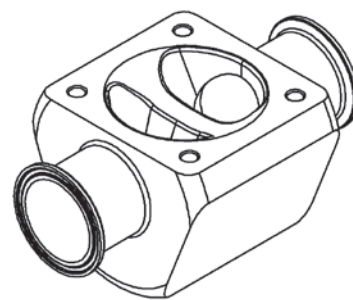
Valve body of Type 3345, stainless steel with clamp connections
